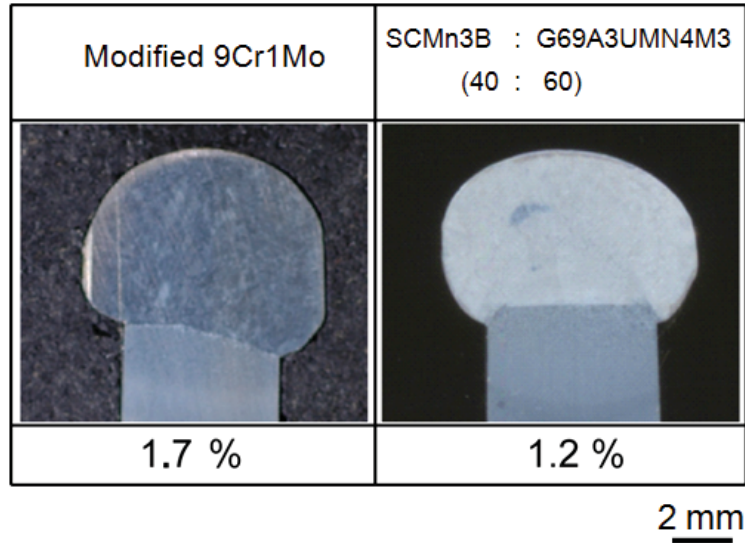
Typical dilution ratio and cross sections after buttering welding.
